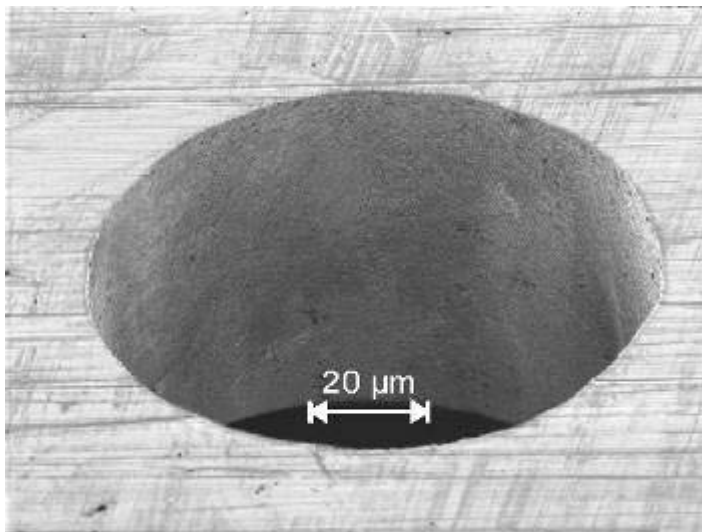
Hole drilling in 100 μm steel sheet with a STACCATO laser
